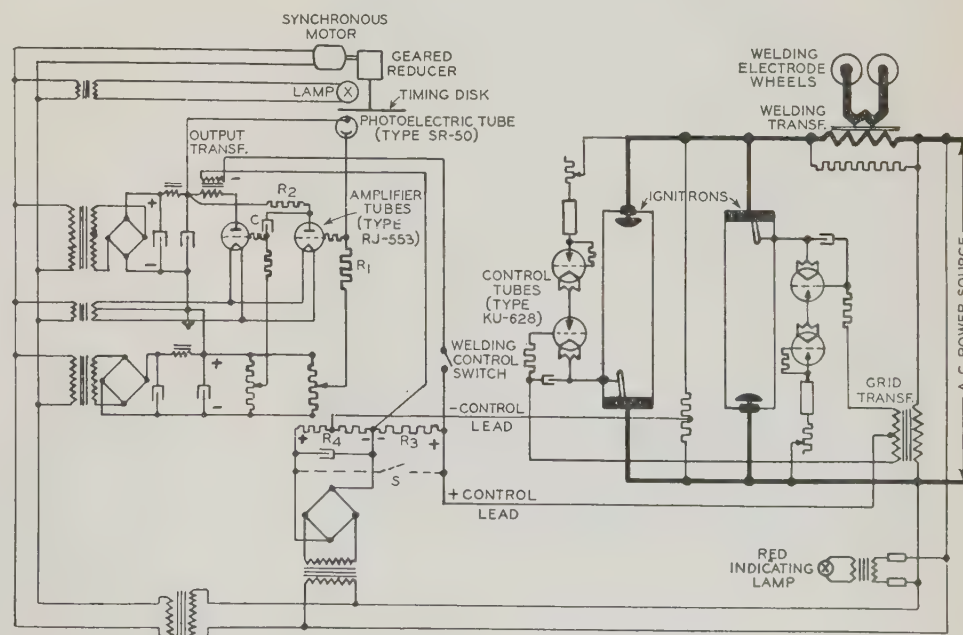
Schematic wiring diagram of the seam welding timer
